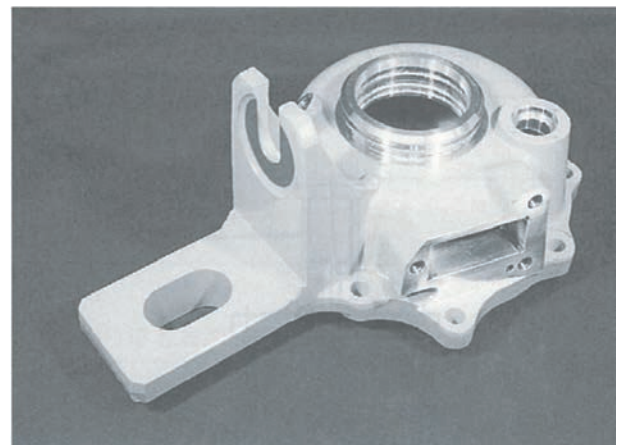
Main parts and parts shape of bogies for Shinkansen.
